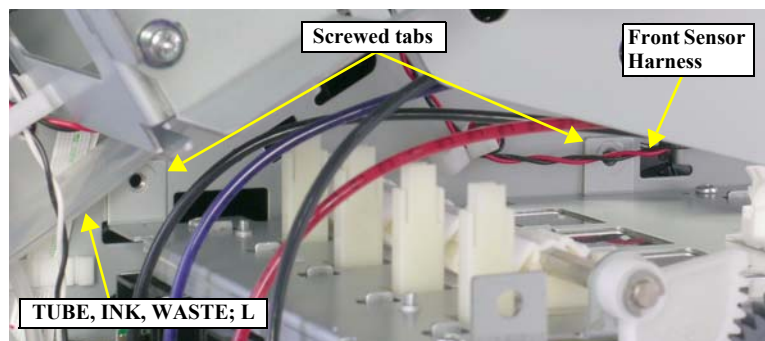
Screwed Tabs located at Upper Side of the HOLDER ASSY., IC, LEFT
